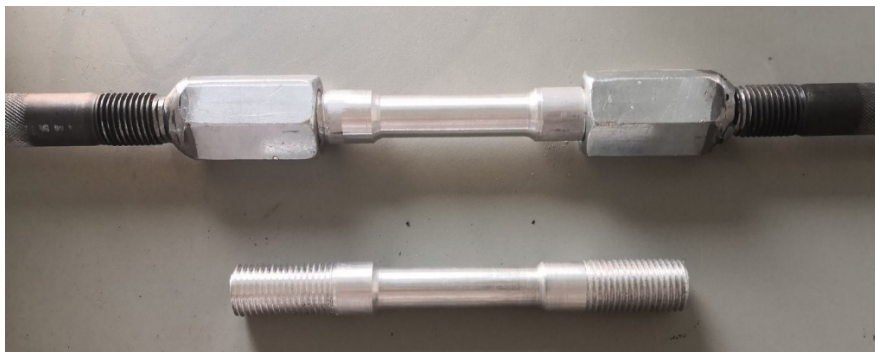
Tensile test specimens and a fixture made to fit the test specimens with the tensile test machine.
